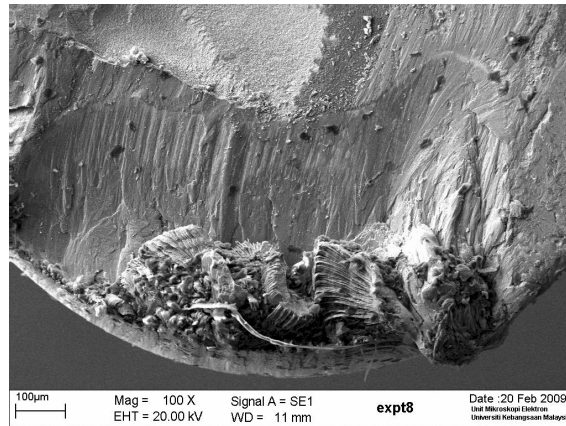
Edge buildup (BUE) on a TiAlN tool used to machine Inconel 718 at a low cutting speed.
